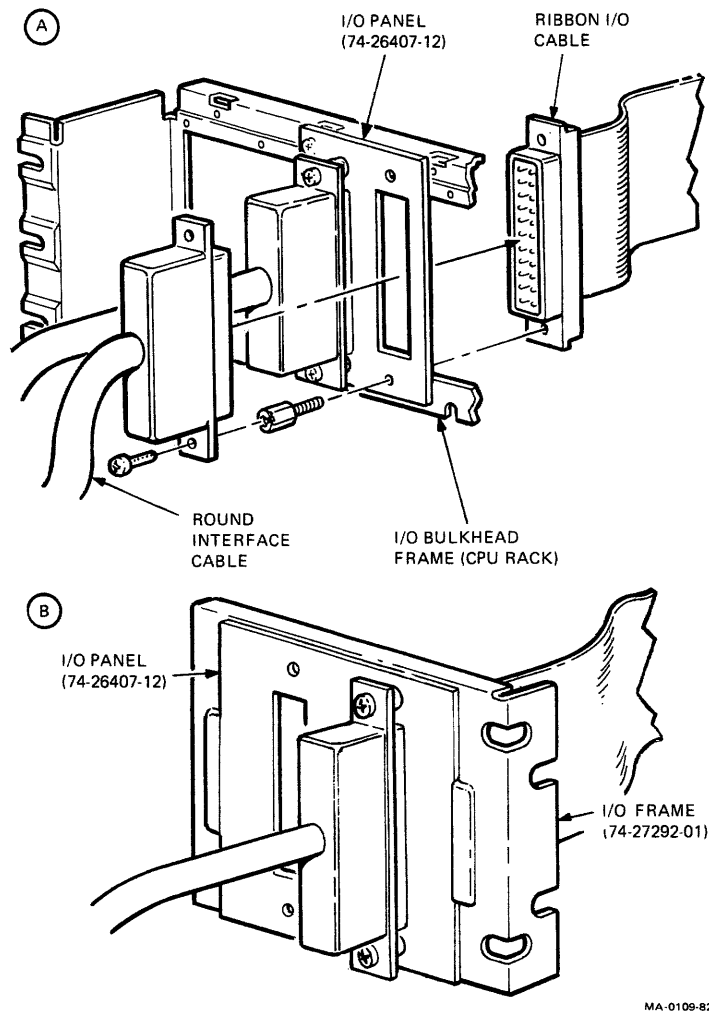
I/O Bulkhead Connector Panel and Frame
